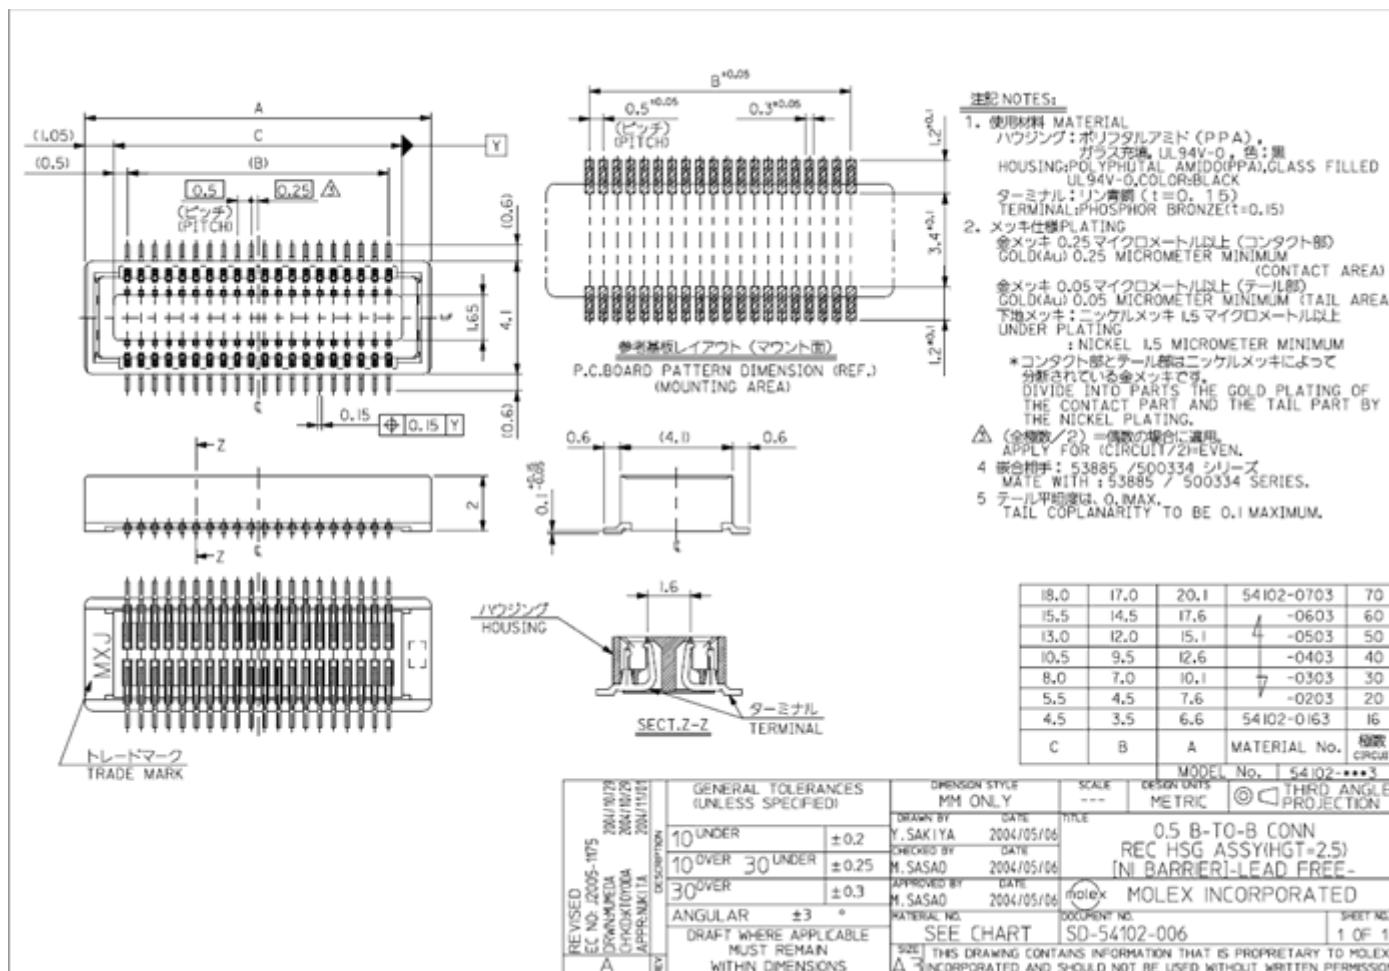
Mechanical dimensions of Molex 54102-0604 connector on BG2-E/BG2-W
